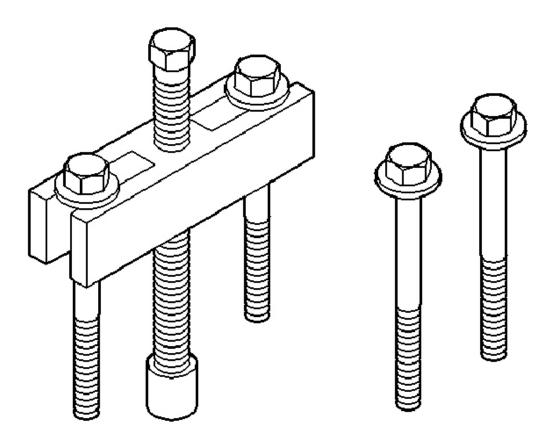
Gear Puller L-4407A Courtesy of CHRYSLER LLC
